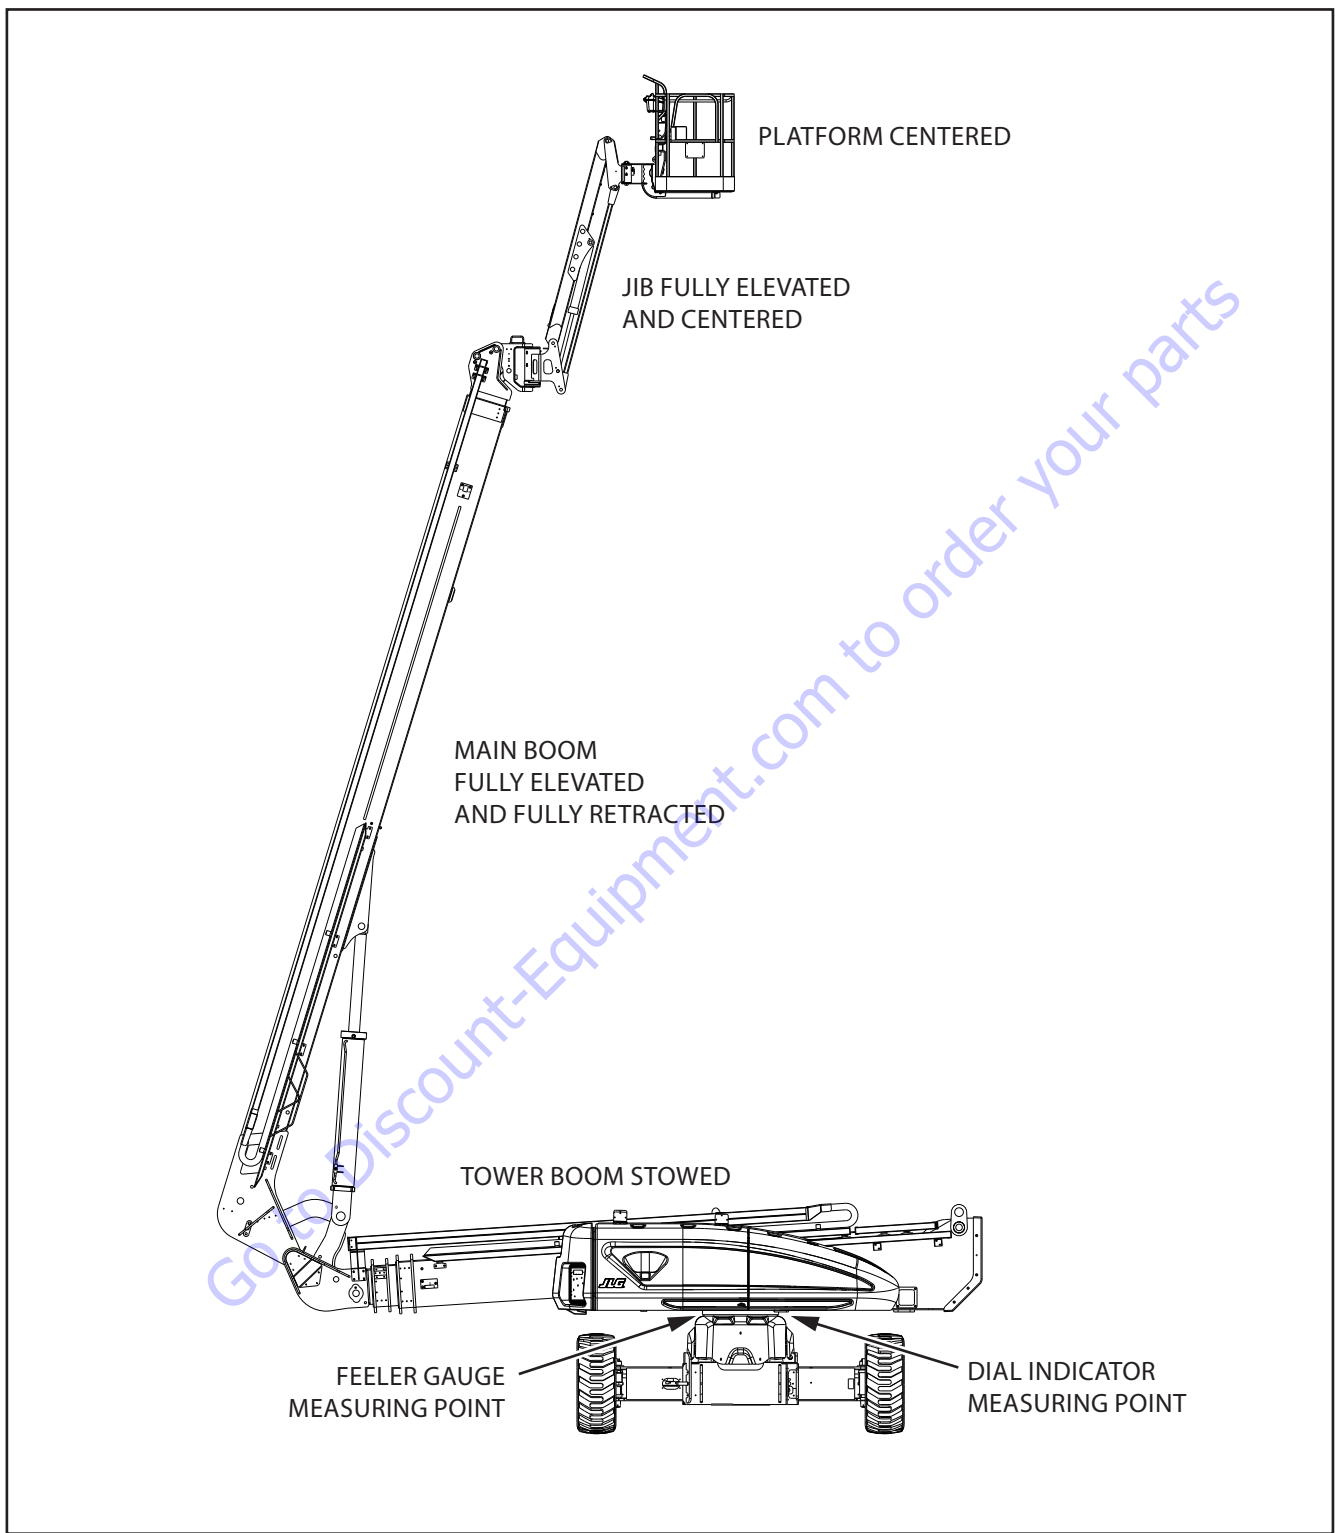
Turntable Bearing Service Boom Placement - 1
